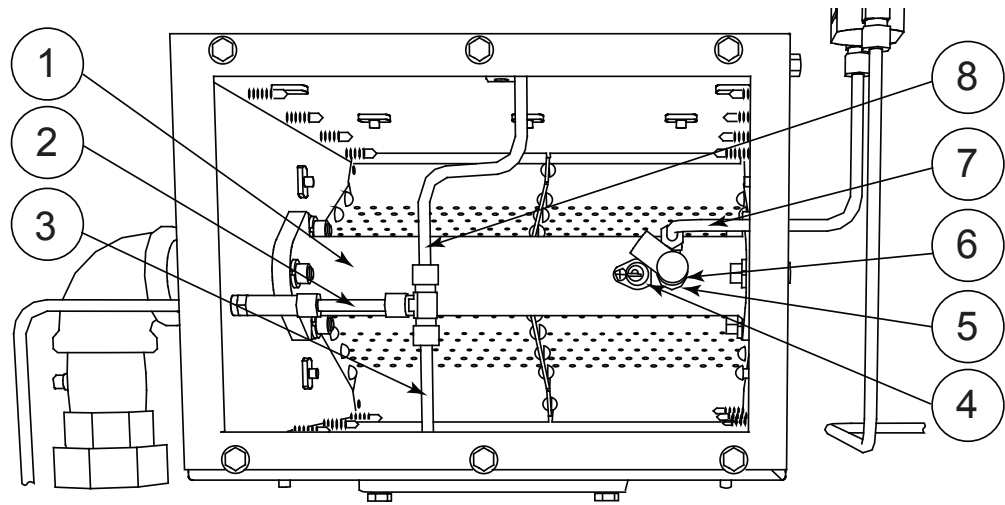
A - Inside View of Burner Housing Rear - 24V Burners
